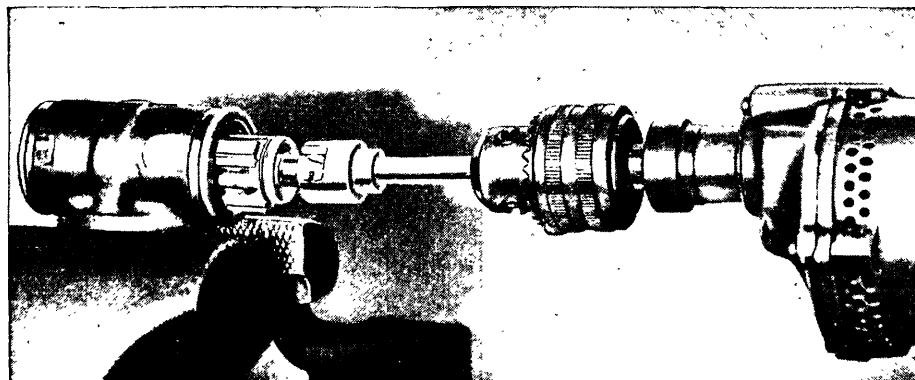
Using hone to clean up master or wheel cylinder (wheel cylinder shown)
